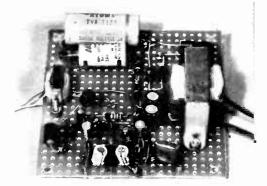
Completed amplifier board ready to be installed in cabinet. Wiring is tight in spots making it necessary to mount several parts on end.
